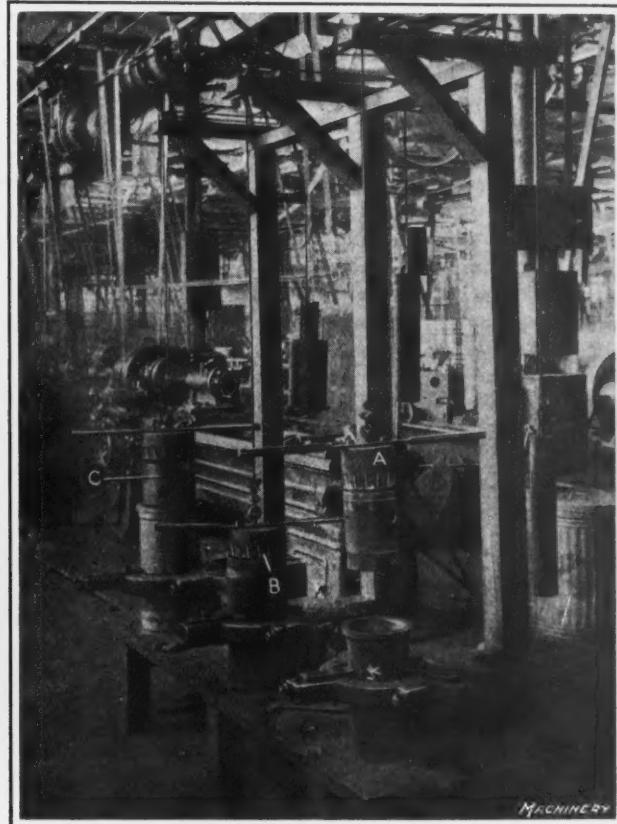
Special Equipment used for chamfering Center Bearings on Tractor Engine Cylinder Liners preparatory to finish-turning
